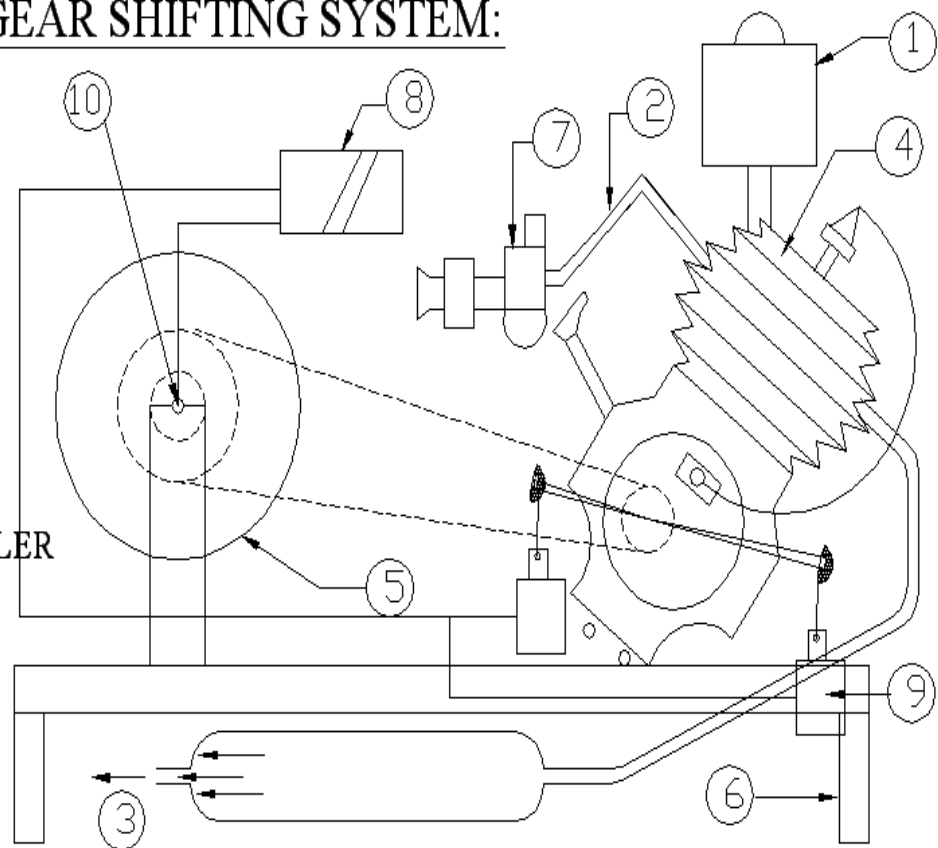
AUTOMATIC ELECTROMAGNETIC GEAR SHIFTING IN TWO WHEELERS
